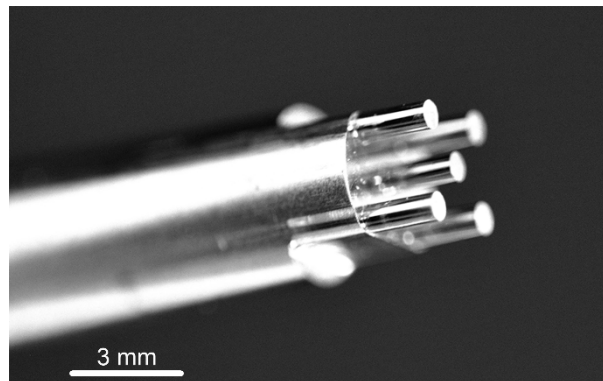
Main micro tooling components: ejector rod and micro-milled pins (diameter: 1 mm).
